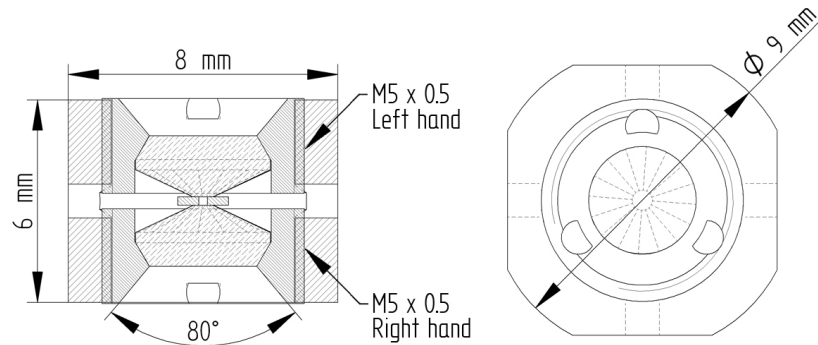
Drawings of the TX-DAC with key dimensions.
